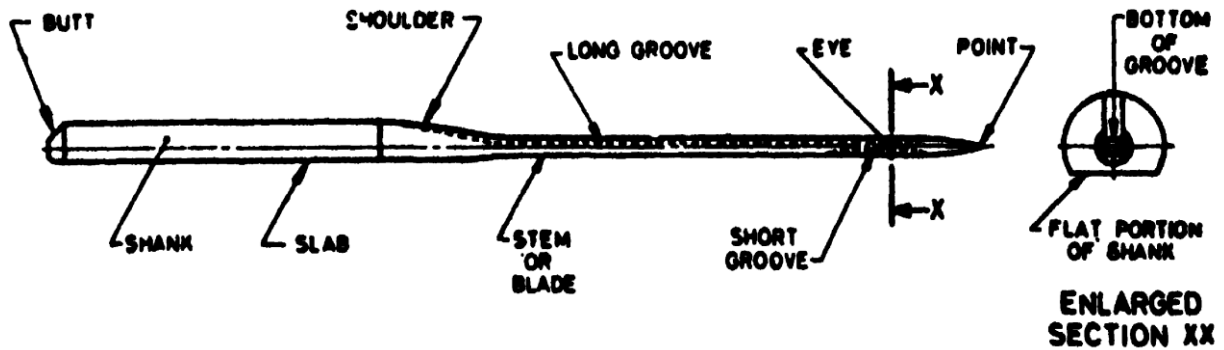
NOMENCLATURE OF SEWING MACHINE NEEDLE
